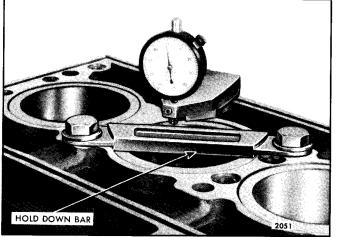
Checking Distance of Liner Flange Below Top Face of Block using J 22273-01 and Hold-Down Tool J 21793-B
